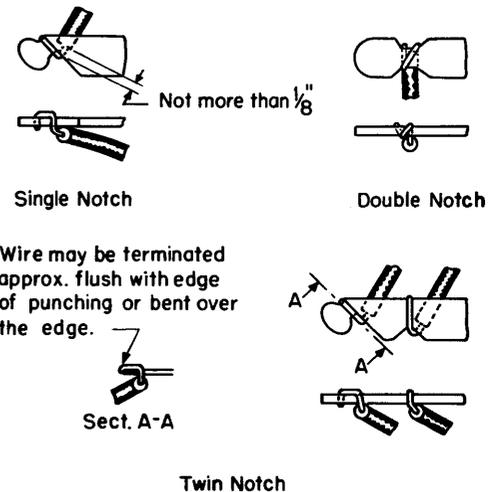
Connecting and Soldering Wires to Notched Punchings.
